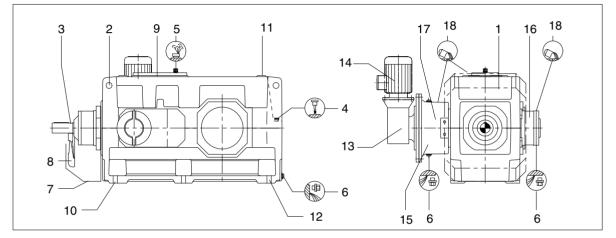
Gear-unit features on gear units type $B3.H \ge 13$
